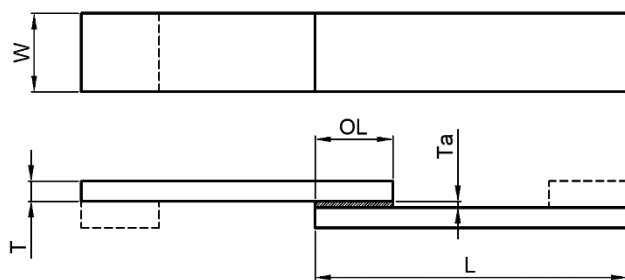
Joint geometry and dimensions (based on ASTM D3163).
